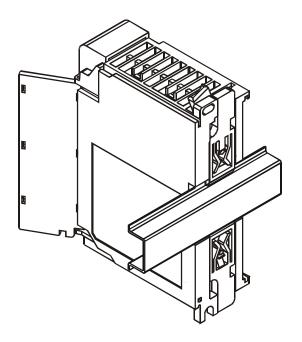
RAIL FASTENERS IN THE CLOSED POSITION
